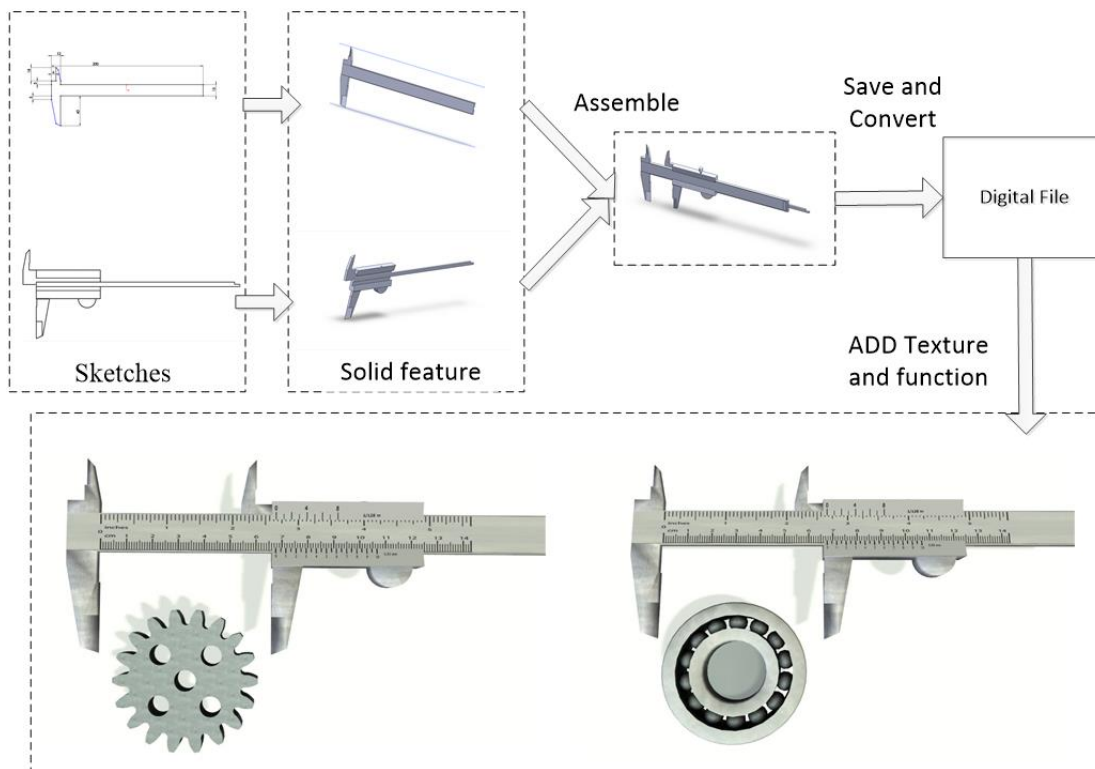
Working process (from CAD modules to virtual environment) for the caliper in the measurement tools module in Section 6.2
